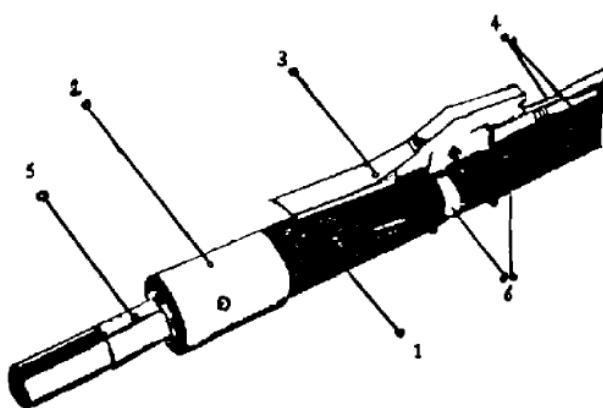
REMOTE-CONTROL ACTUATING-LEVER MOUNTED ON THE BLAST HOSE, ADJACENT TO THE NOZZLE HELD IN THE HAND OF THE OPERATOR. DETAILS OF THE COUPLING ATTACHED OVER THE HOSE, WITH THE INTERNAL THREAD MATING WITH THE THREADED END OF THE NOZZLE ARE ALSO VISIBLE.
